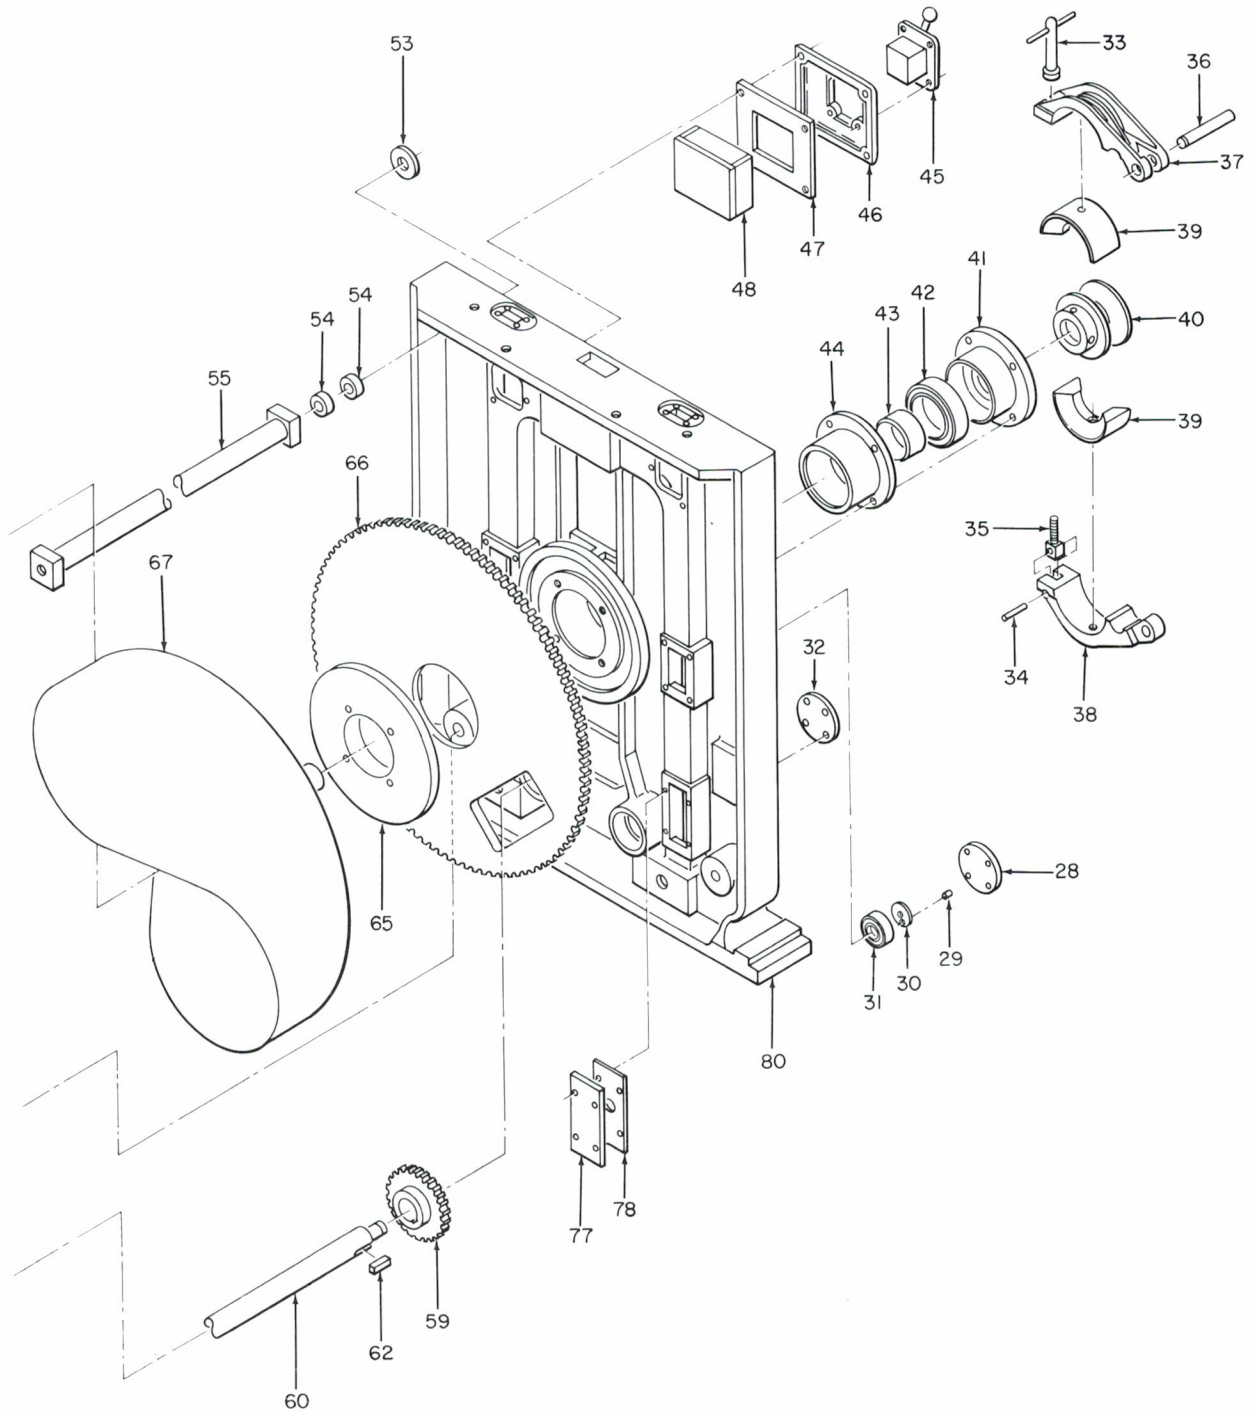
Frame and Drum Assembly Upper and Lower (Sheet 2 of 2)
